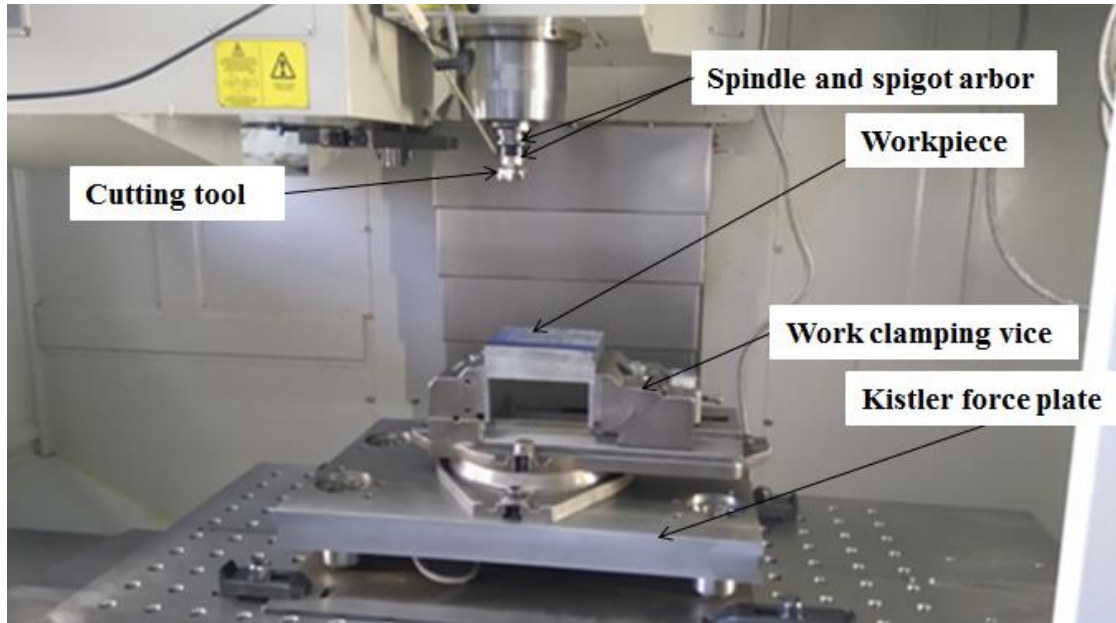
Machining setup inside the Bridgeport GX 1000.
